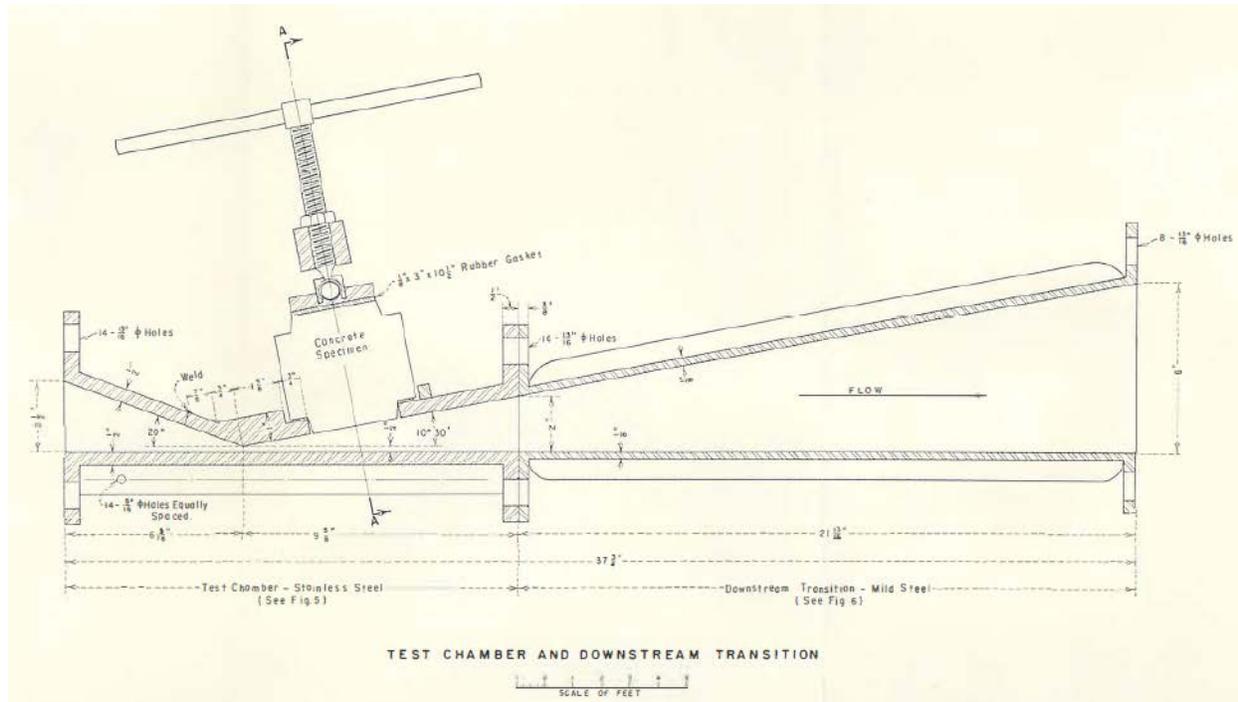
Original drawing of the cavitation venturi machine used in the current laboratory testing. Drawing is in profile view with flow going left to right.
